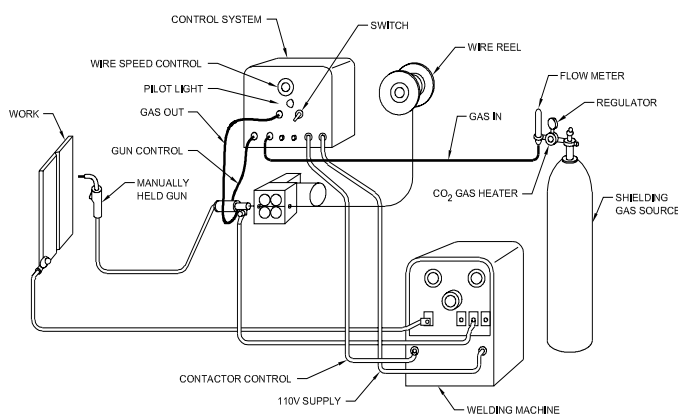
Flux Cored Arc Welding
